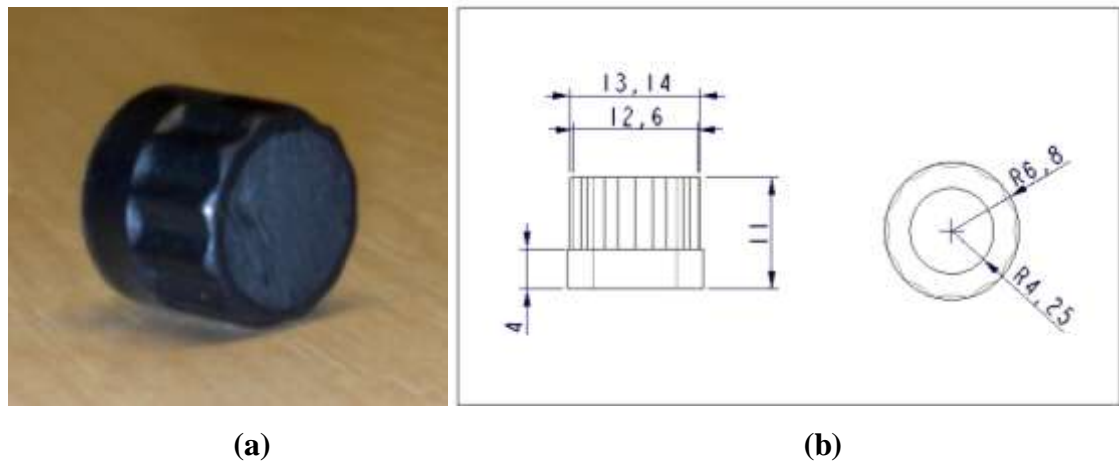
(a) Picture of bi-hexagonal bolt head. (b) Bolt head dimensions (mm).
